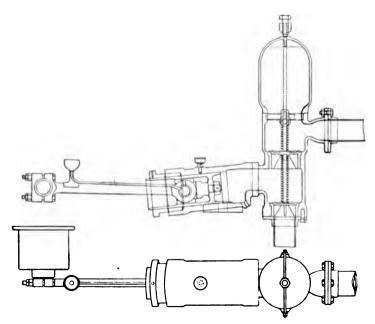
Bilge Pump driven off Pin on Flywheel Cap.
